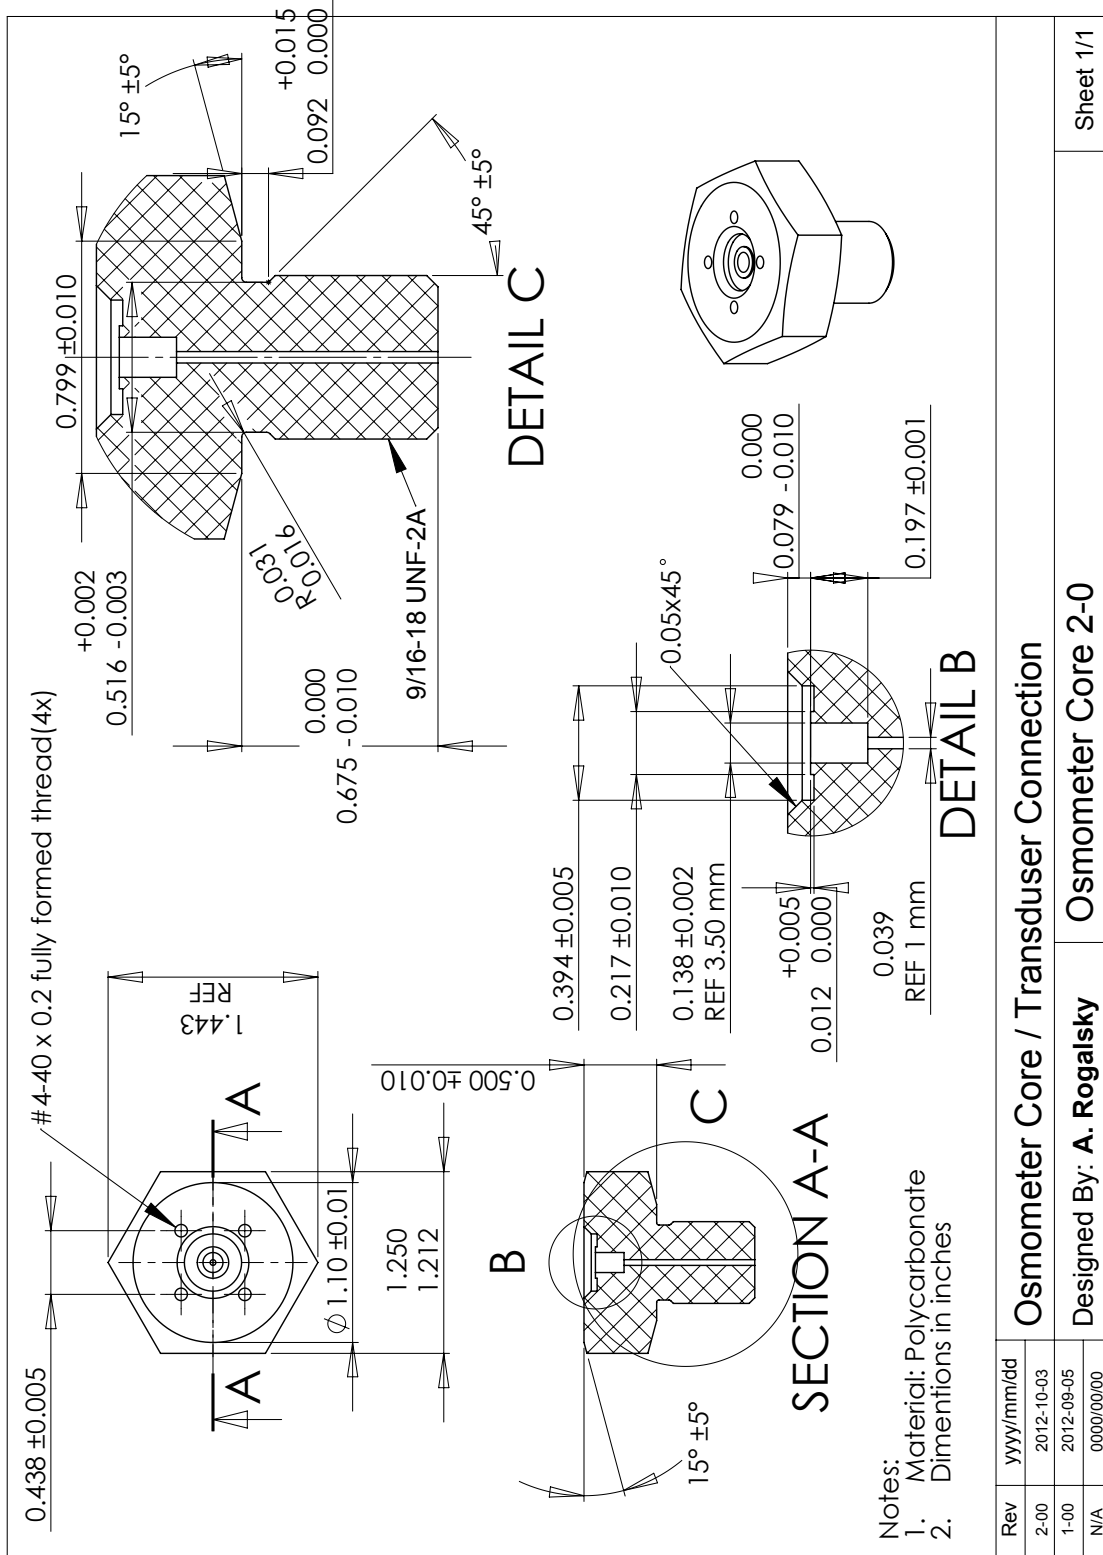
Transducer Osmometer Core Assembly / Osmometer Core
